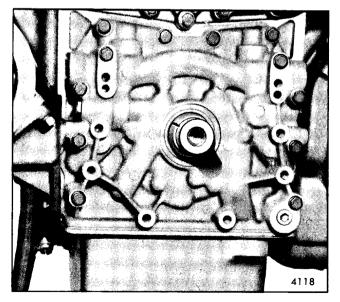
Engine Front Cover Mounting (Lower) -- 6V-Engine
